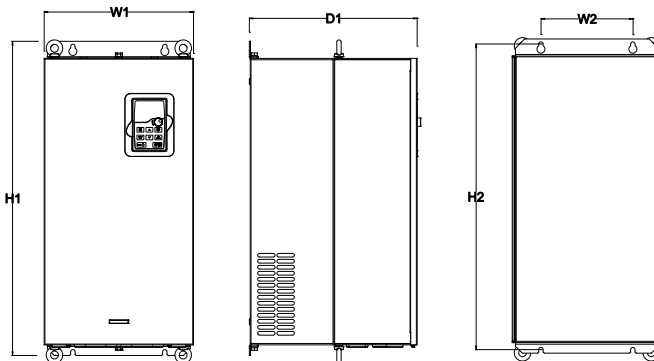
Wall installation of 380 V 37-110 kW VFDs
